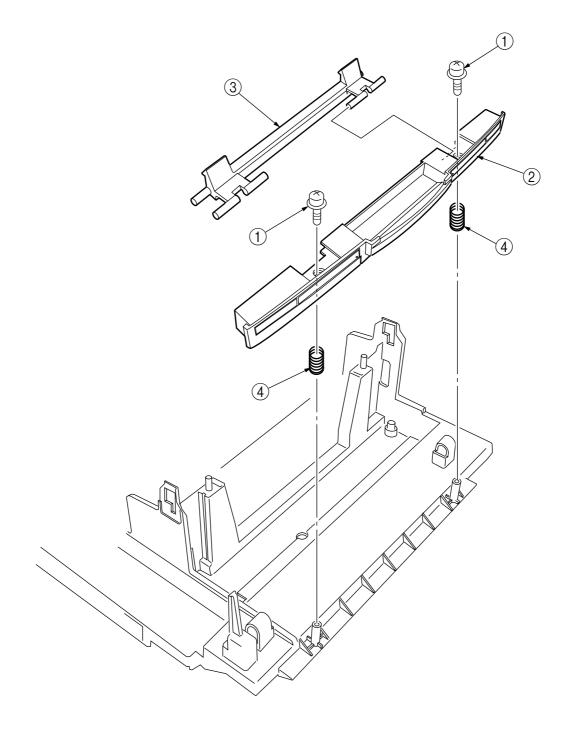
Top Cover Handle/ Tope Cover Latch/ Top Cover Latch Spring
